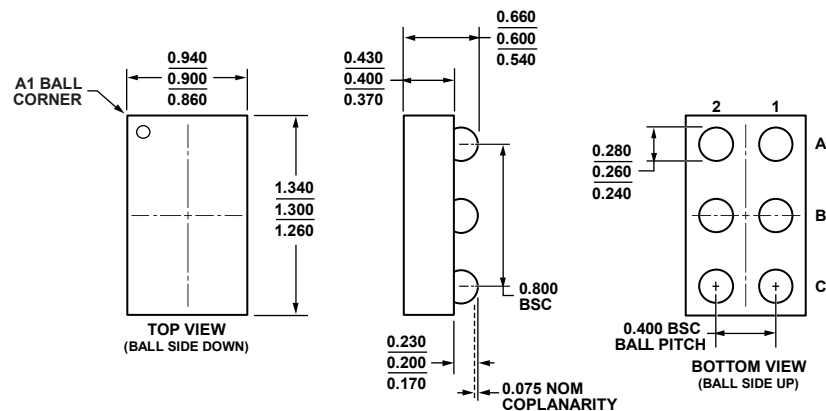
6-Ball Wafer Level Chip Scale Package (WLCSP)
